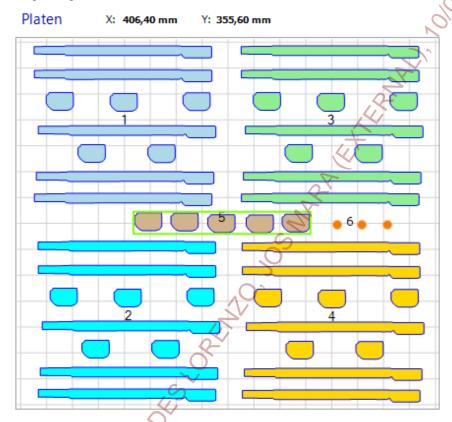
Print Job Configuration for Smaller Machine Platform – Dog bones and Density Cubes
